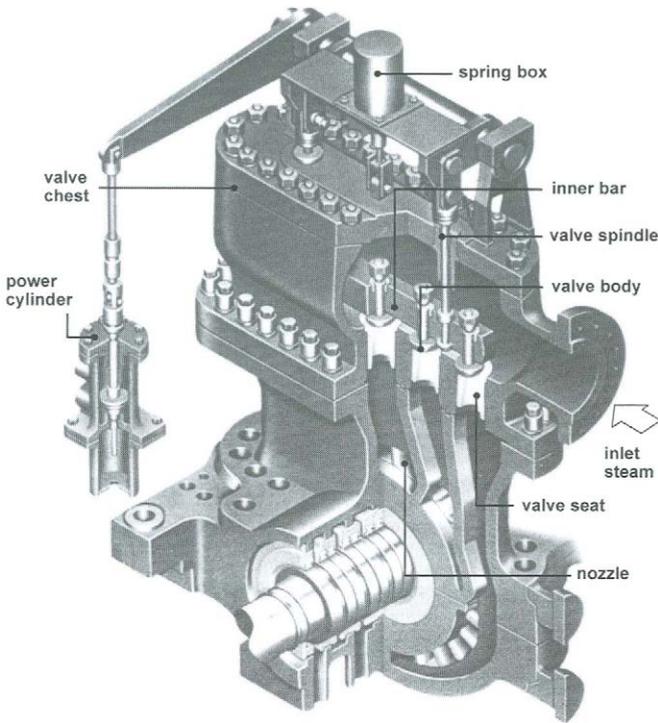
Bar lift (Courtesy of M.H.I.)
